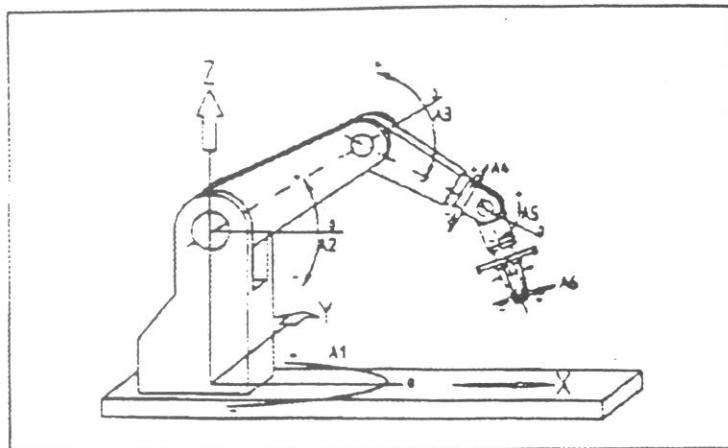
Axial coordinate system of a six-axis welding arm robot
